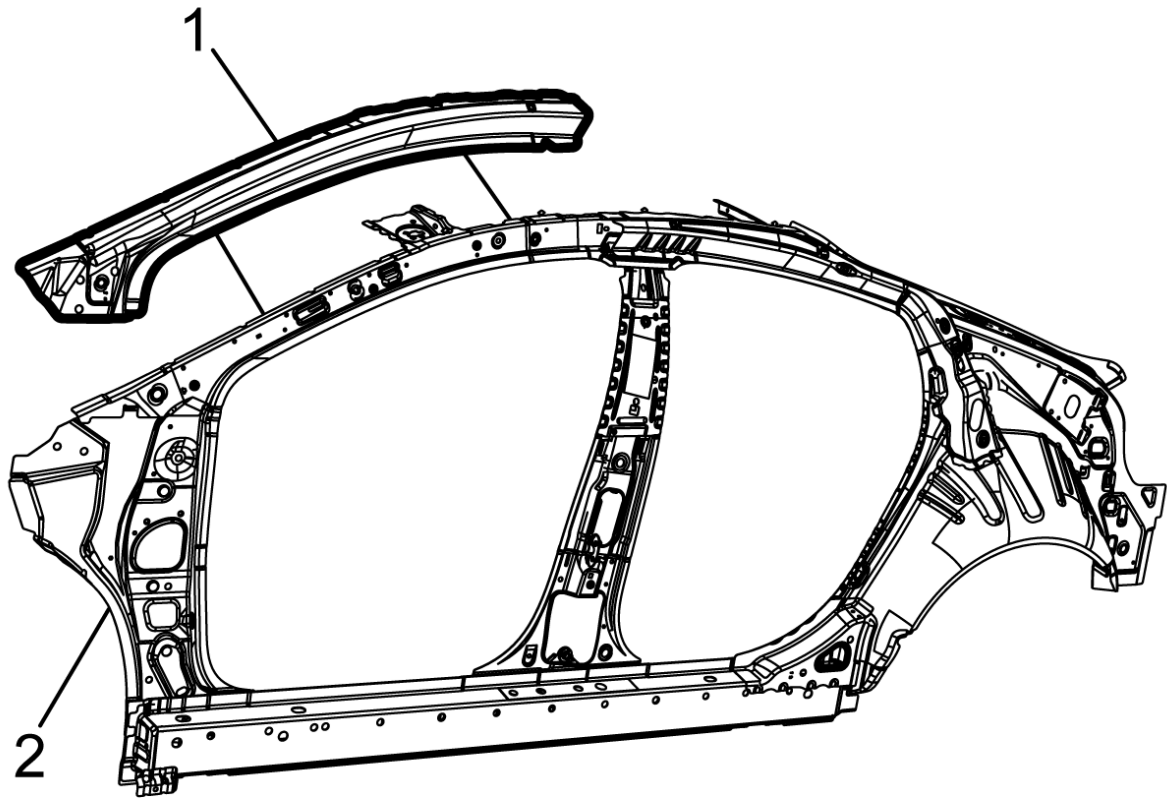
Body Side Frame Upper Front Extension Reinforcement
